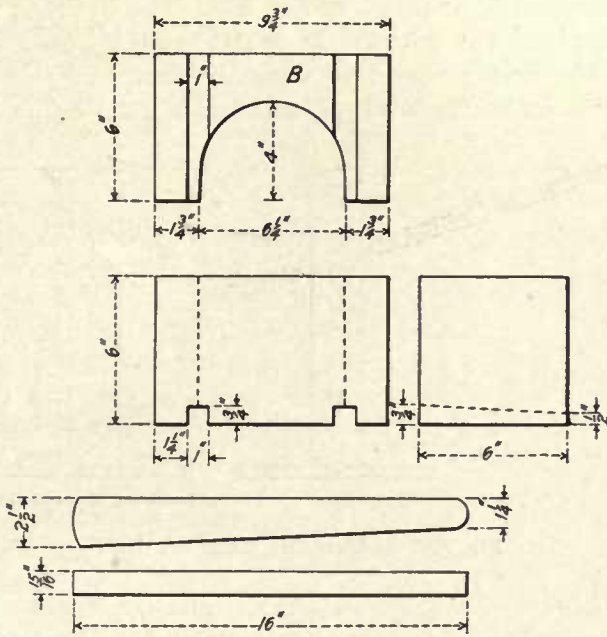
Block and Wedges for Removing Eccentric Crank Arm of Walschaert Valve Gear.
